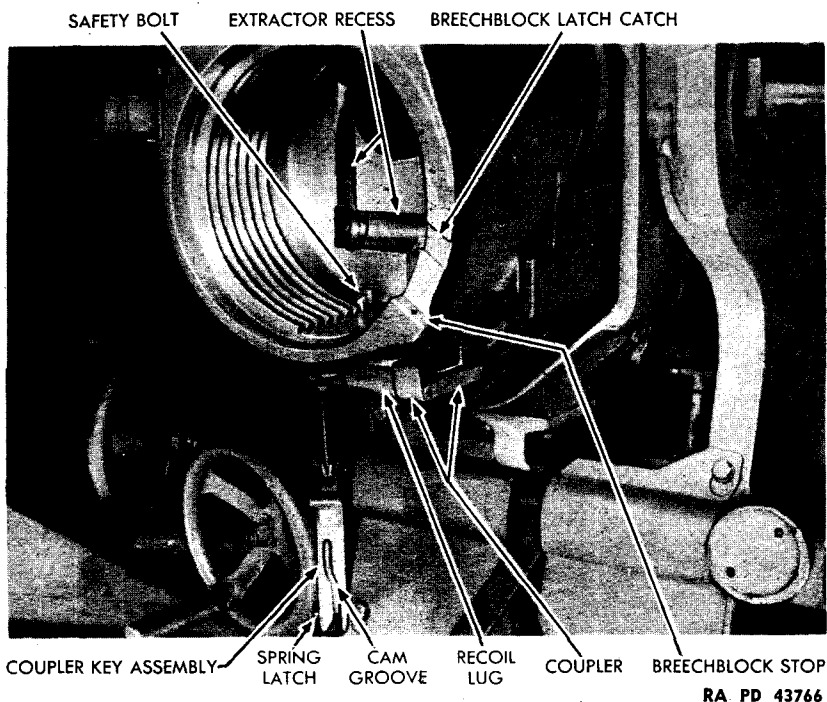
Coupler Key Removed, Safety Bolt in Locking Position
